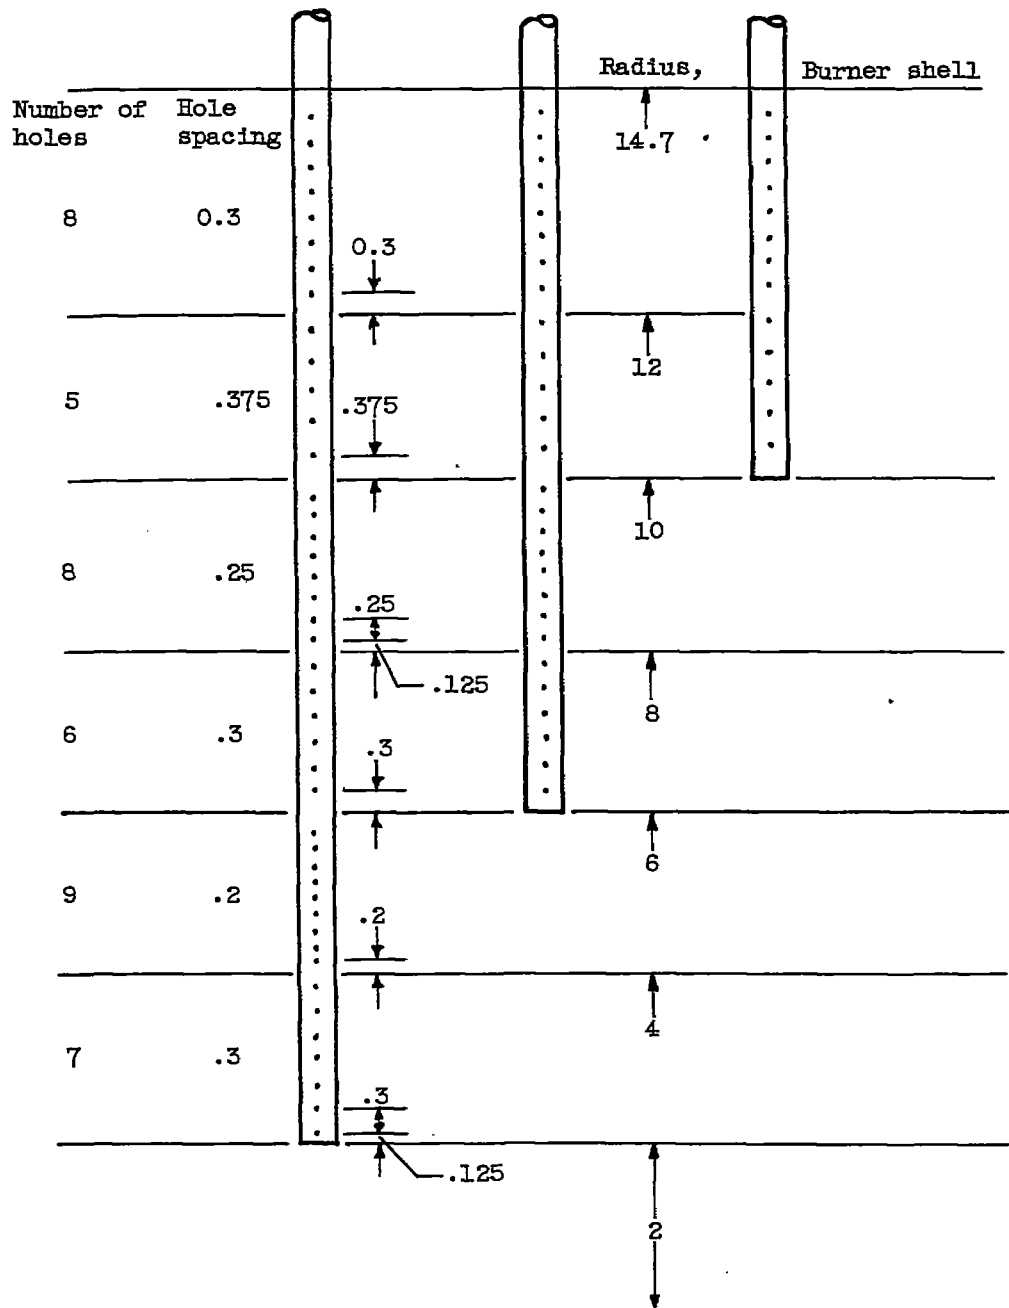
Fuel-injector sector, configuration B; 8 sectors required. Material, Inconel; all holes, 0.028-inch diameter; all holes drilled for 100-percent axial injection. Total number of holes, 351. (All dimensions in inches.)
